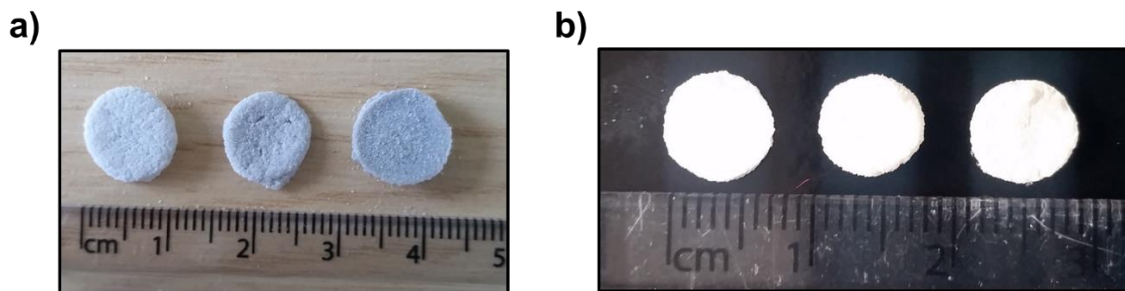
Printed and sintered AW discs. a) Green parts. b) Sintered parts. Ruler spacing: 1 mm.
